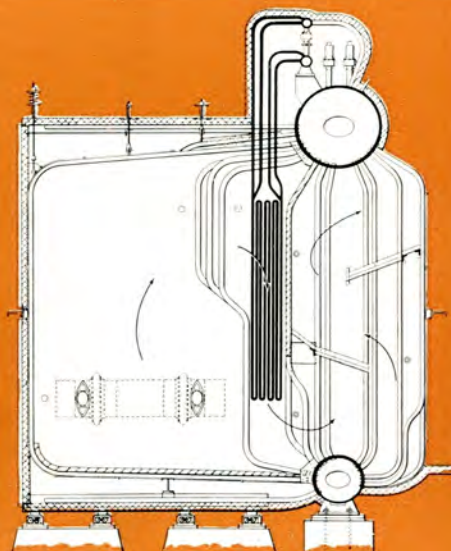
Arrangement of C-E VU-55 Boiler for superheated steam showing cross-flow baffling and top gas outlet.
